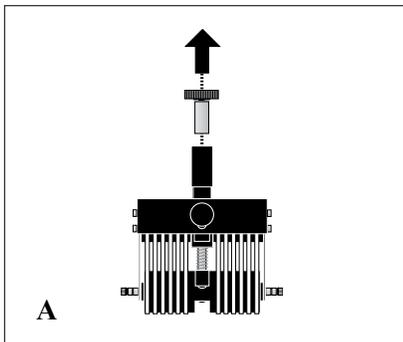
Adjusting Gate Assembly for Low-Tension
